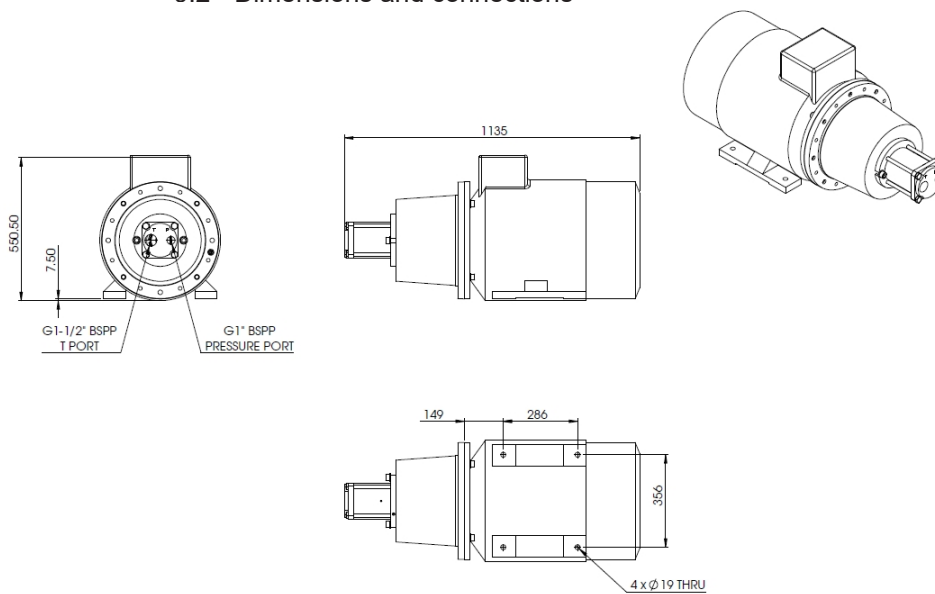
Dimensions of NOVA P60 with 37 kW motor
